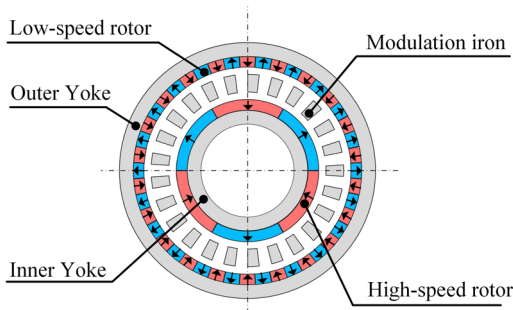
Two-dimensional structure of surface-mounted type permanent magnet (PM) coaxial magnetic gear.
